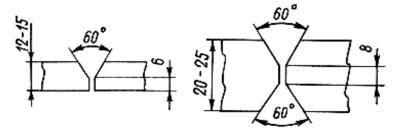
Edge preparation recommended for butt weld test assemblies to approve "wire - gas" combinations for two-run welding
